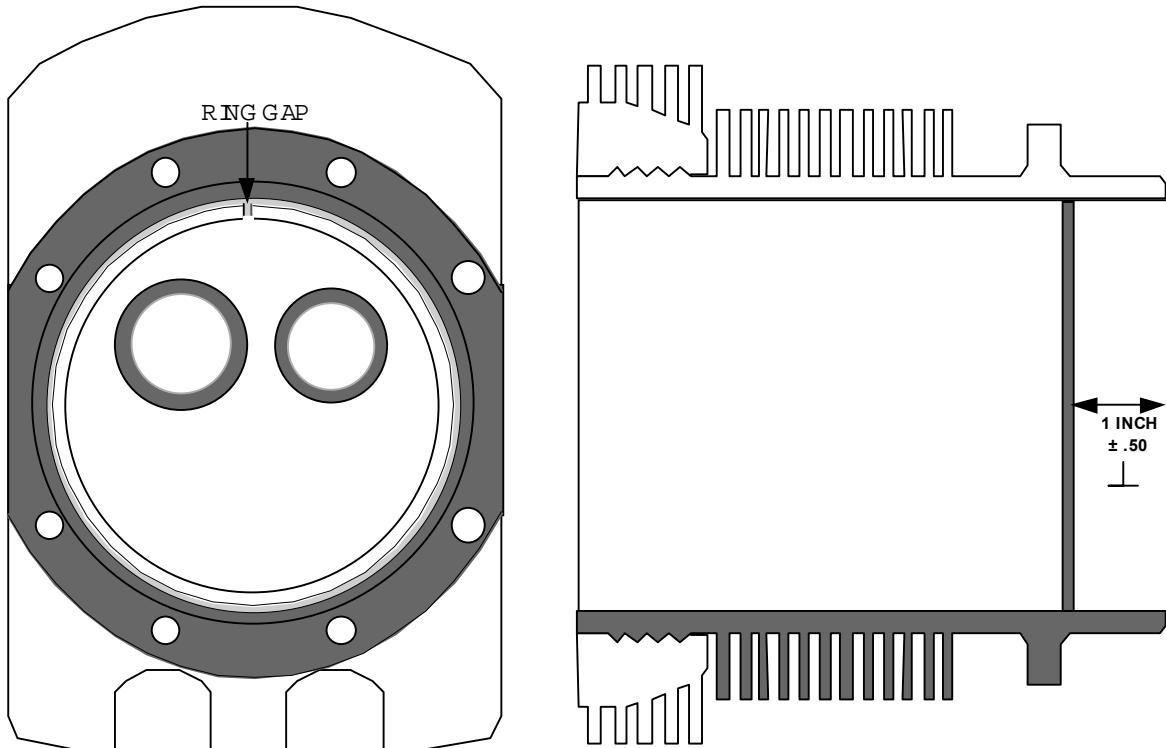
LOCATION FOR INSPECTING RING GAP
